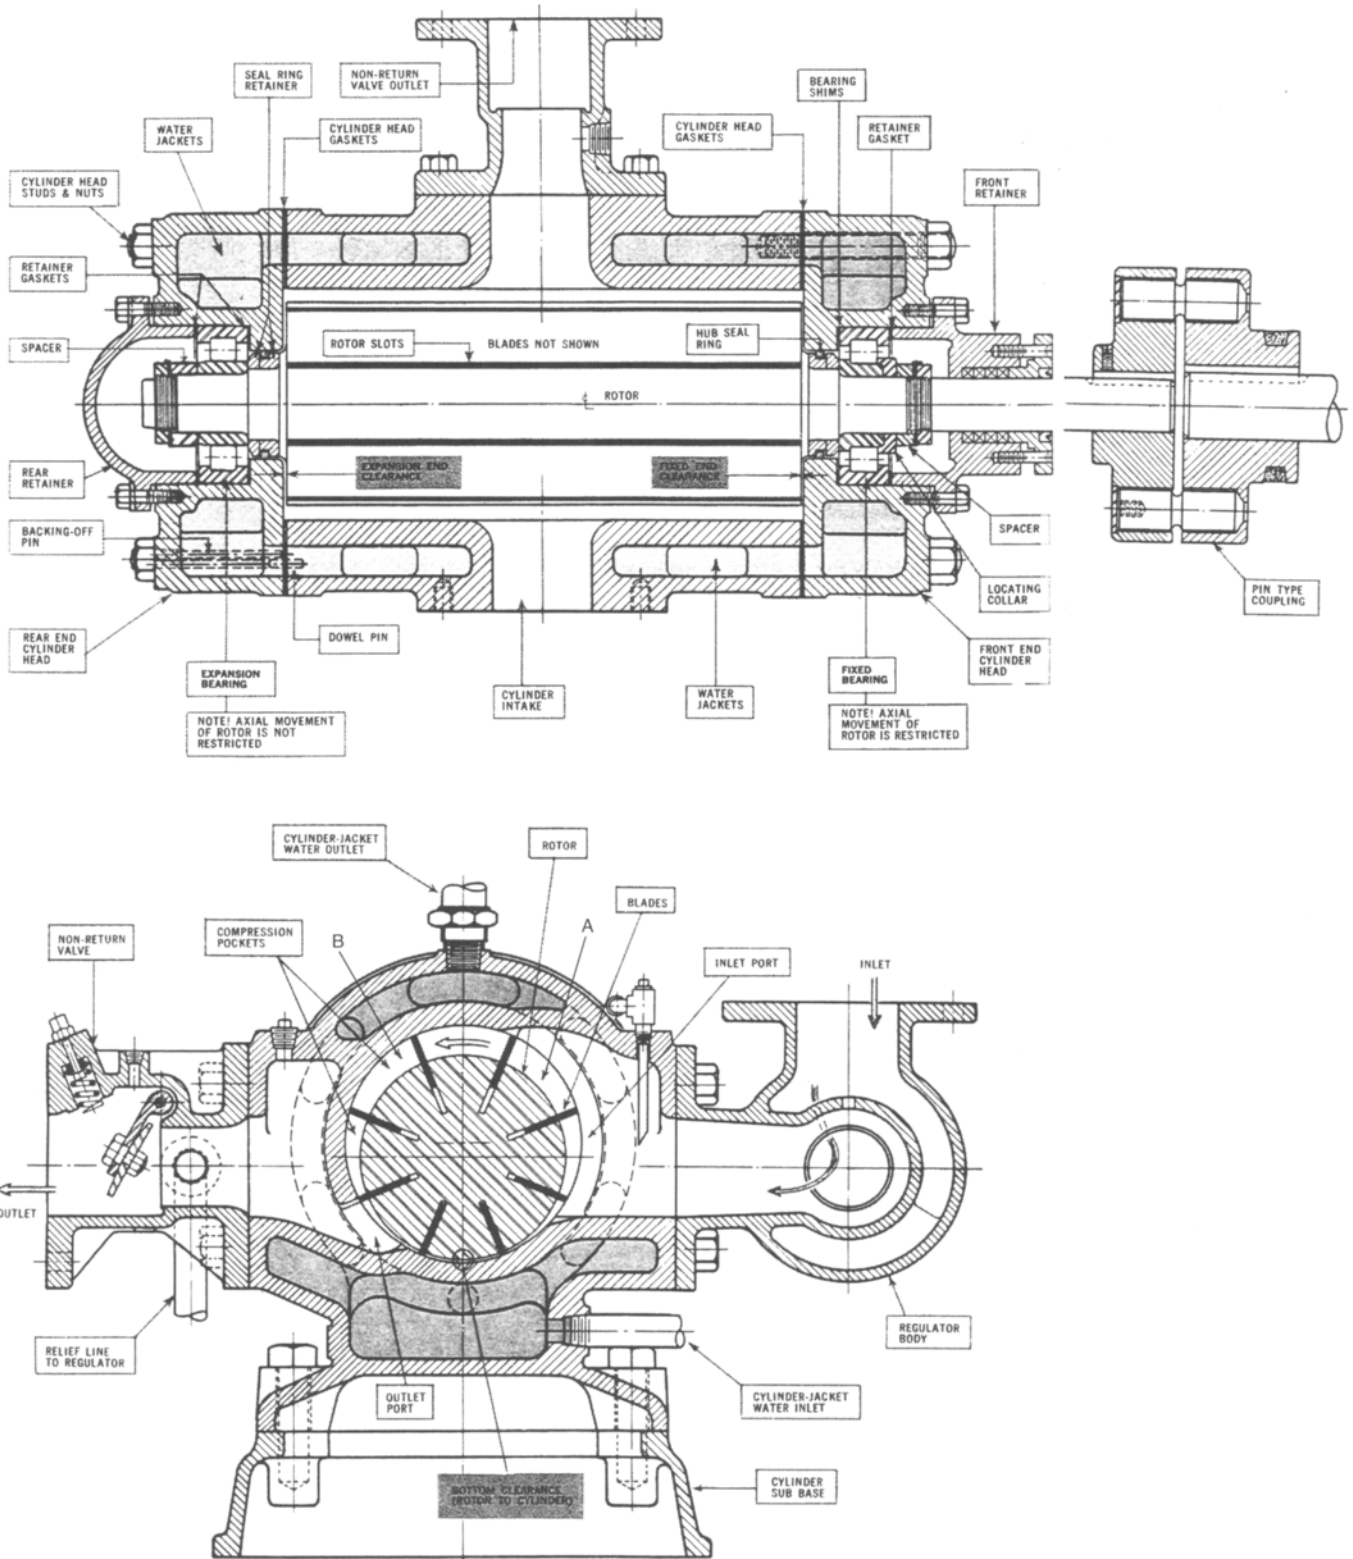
Cross-section of sliding-vane rotary compressor. (Used by permission: Fuller Bulk Handling.)
